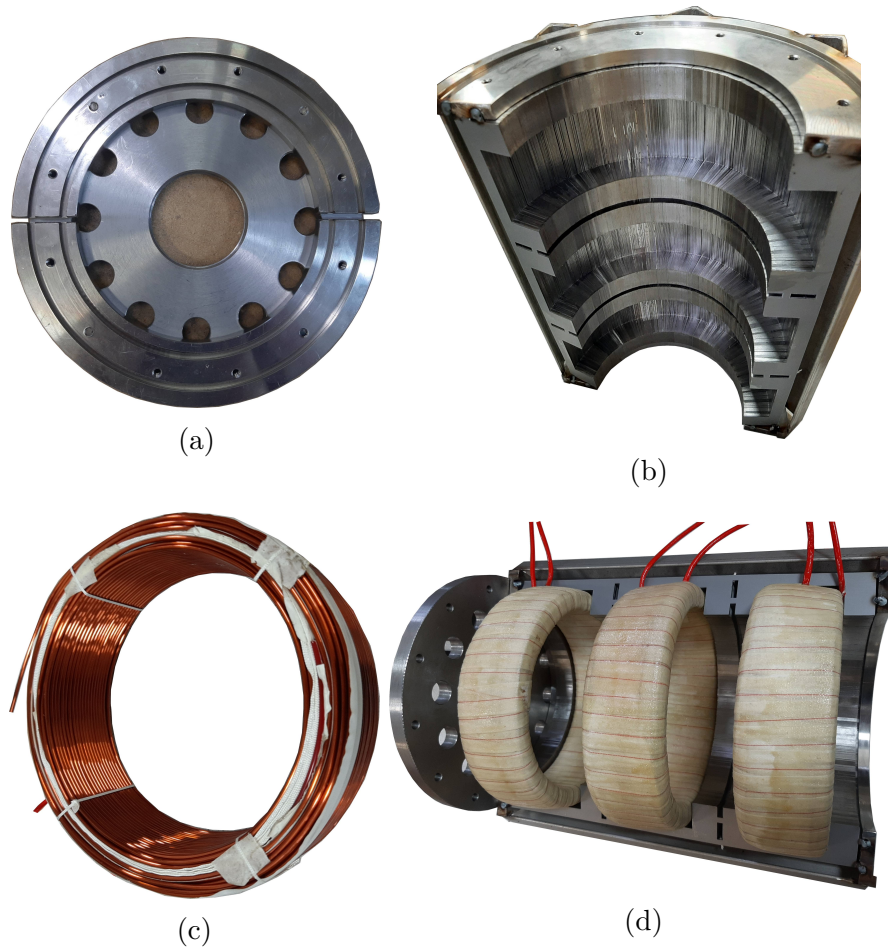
Assembly of the stator (a) End plate and lamination end plate, (b) Stacked stator half, (c) Coil before cloth and resin, (d) The coils in one half of the stator
